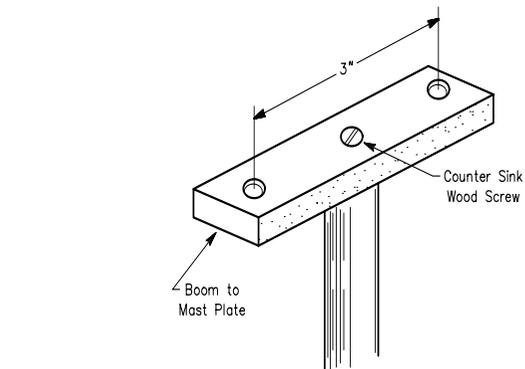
Boom-to-mast plate for the 144-MHz quad. The screw hole in the center of the plate should be countersunk so the wood screw attaching it to the mast does not interfere with the fit of the boom.
